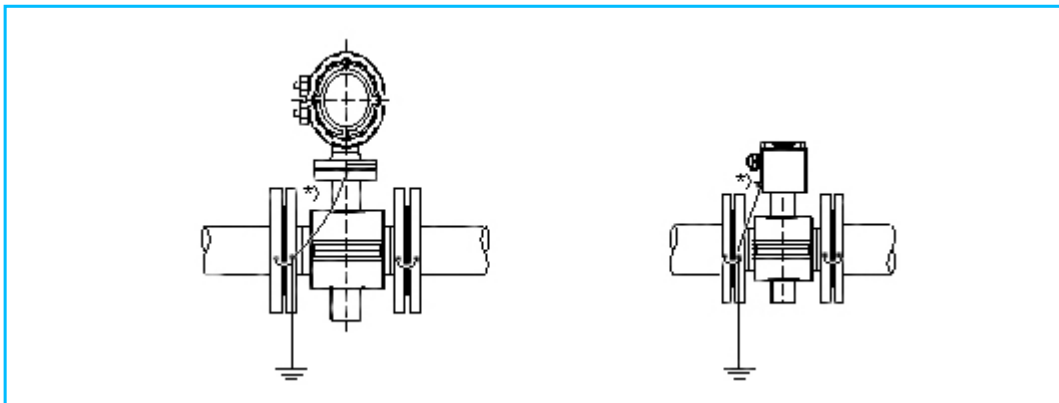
Flowmeter Primary DN 3 – DN 100 [1/10" – 4"] Flanged
